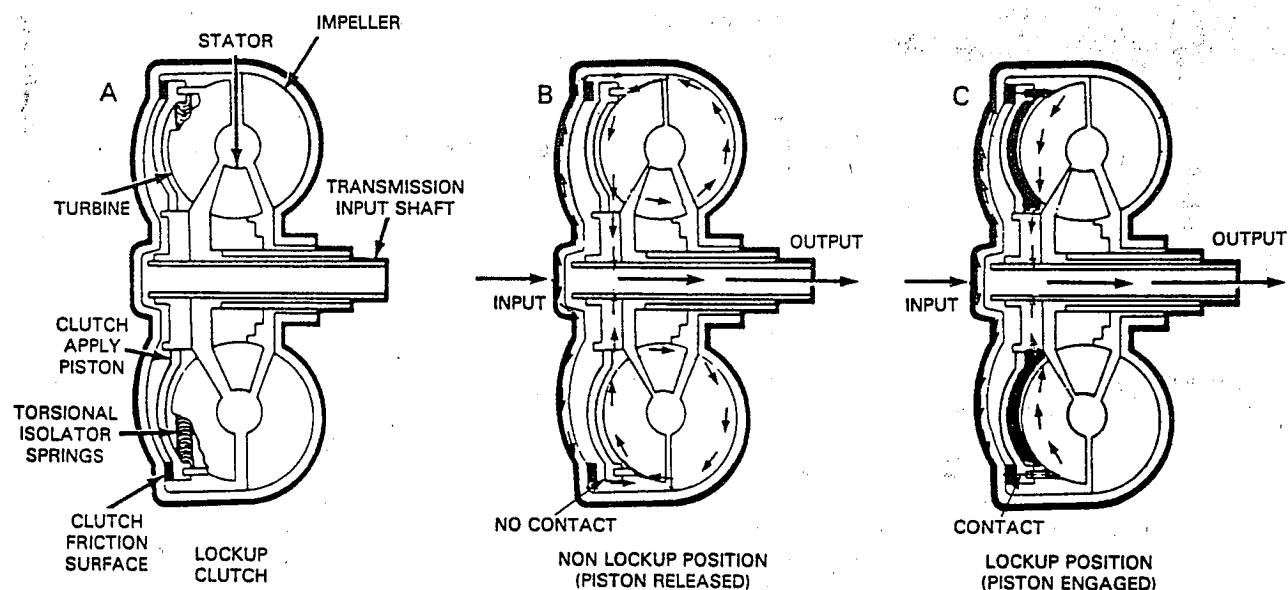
Operation of a lockup torque converter. A—Lockup clutch design. B—Lockup apply piston has released and unit is unlocked. In this mode (condition or stage), it will operate as a standard torque converter. C—Apply piston has moved against clutch friction surface thus locking converter. In this mode, it will operate as a solid drive unit with no slippage between turbine and pump (impeller).
